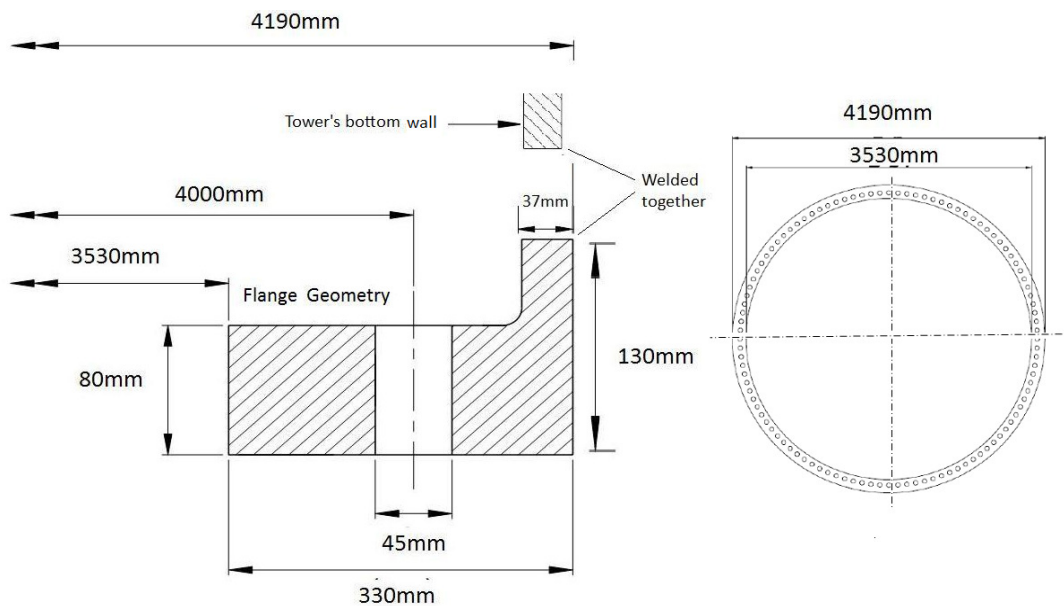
Design of a flange which is welded to the foundation and tower base
